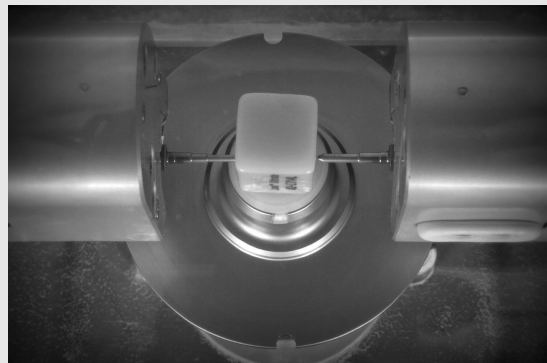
Subtractive method such as CNC machining using resin block.⁷⁾
